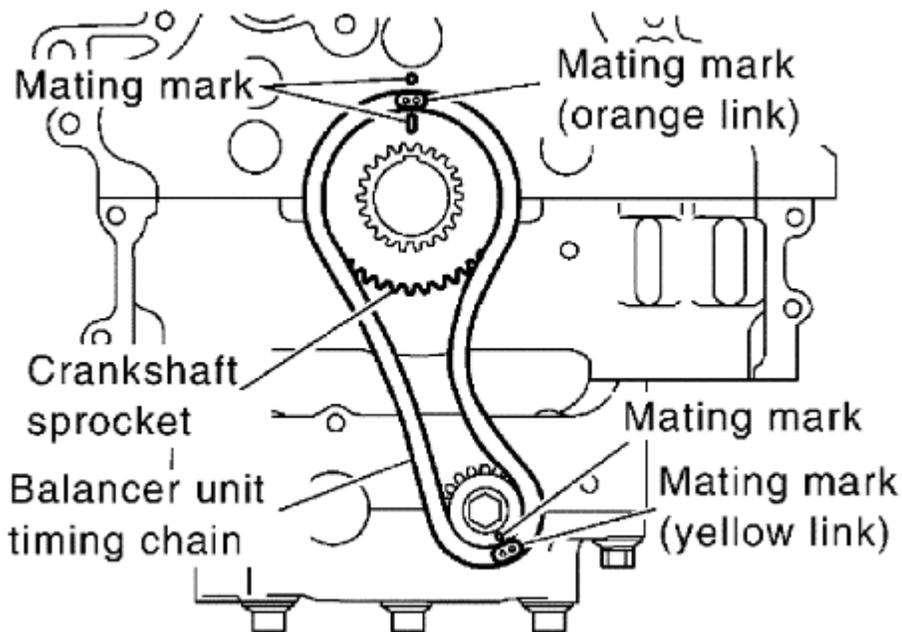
Identifying Crankshaft Sprocket, Balancer Unit Timing Chain With Mating Marks
